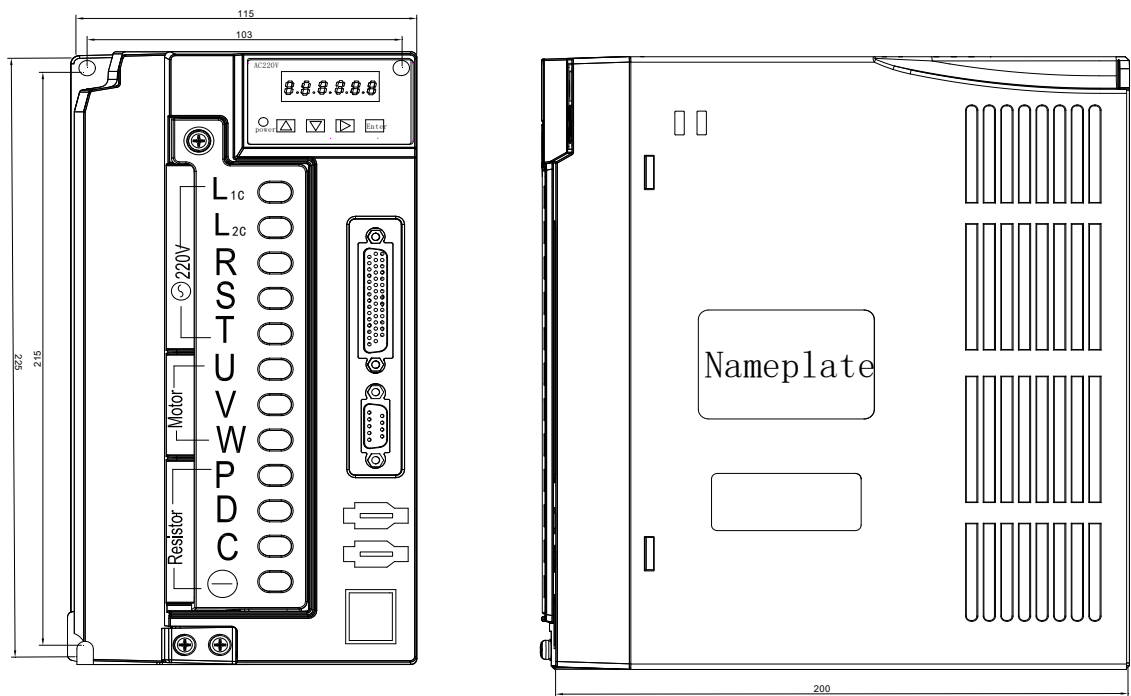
WD-50B2-J, WD-75B2-J series side installation dimension
